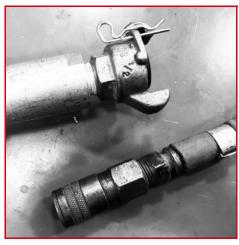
UNIVERSAL COUPLER (TOP) AND QUICK DISCONNECT (BOTTOM)
